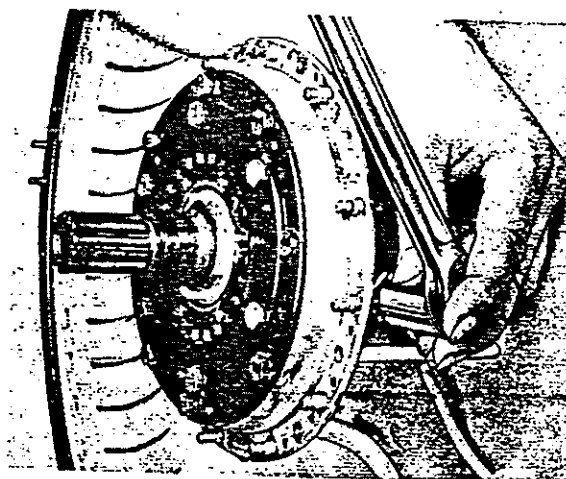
Removing Number Two Main Bearing Oil Inlet Strainer
